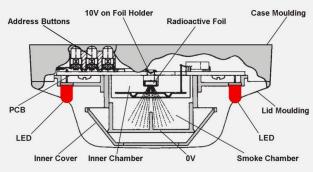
Sectional View – Discovery Ionisation Smoke Chambe
